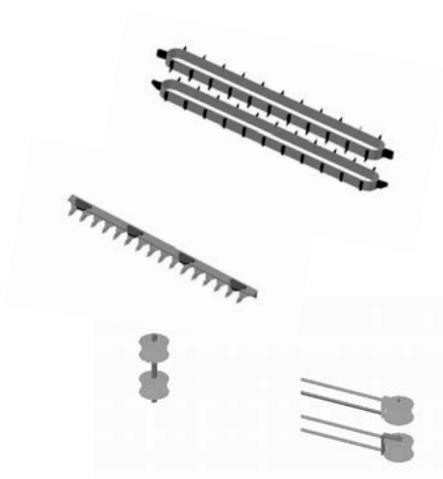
Cutter bar, conveyer belt and pulley of self-propelled reaper.
